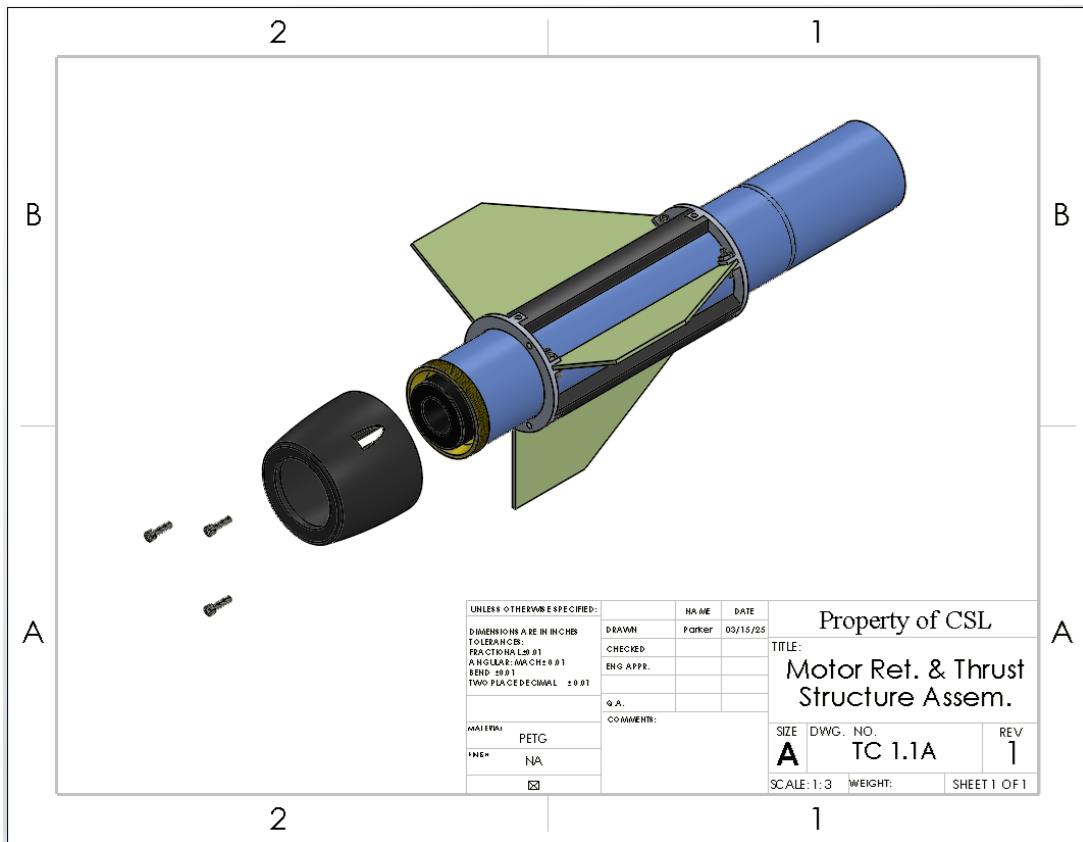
SolidWorks drawing of the motor retention system as assembled on the vehicle thrust structure.
